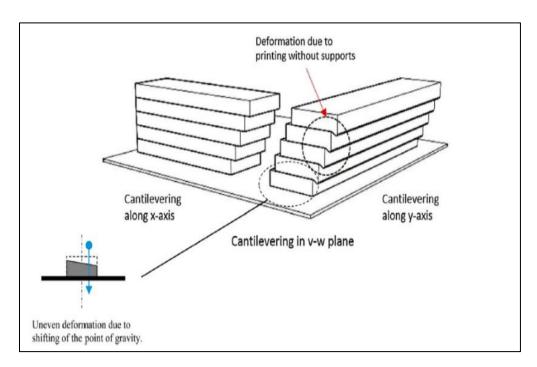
Cantilevering layers of filament in the v,w- and u,w-plane [23]
